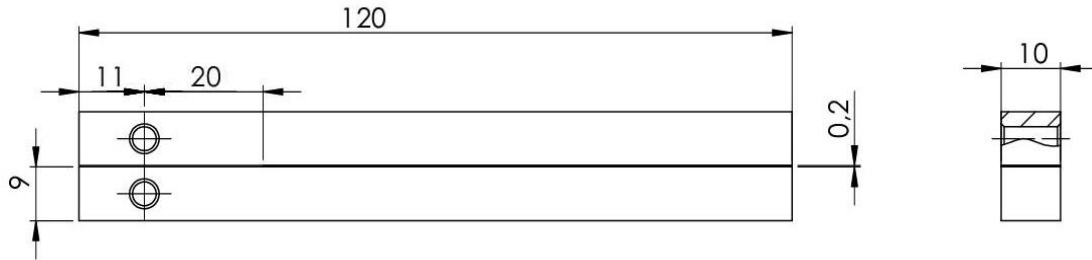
Geometry of the small DCB specimen; final specimen (dimensions in mm)
